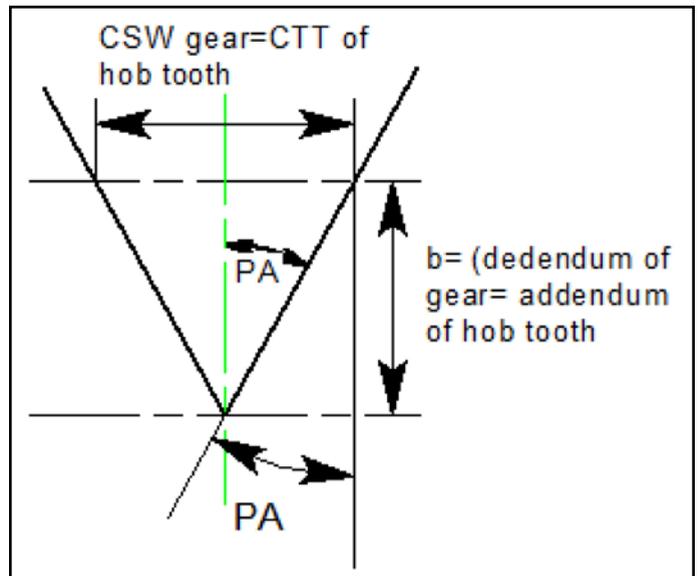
Hob tooth details for sharp corner (zero hob tip radius).
